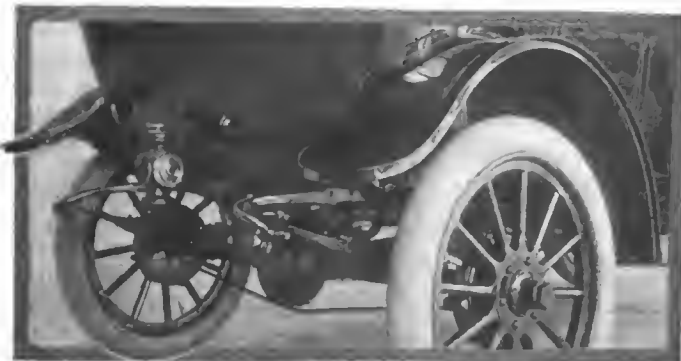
Rear springs suspension, showing springs shackled to spring horns bolted to frame
